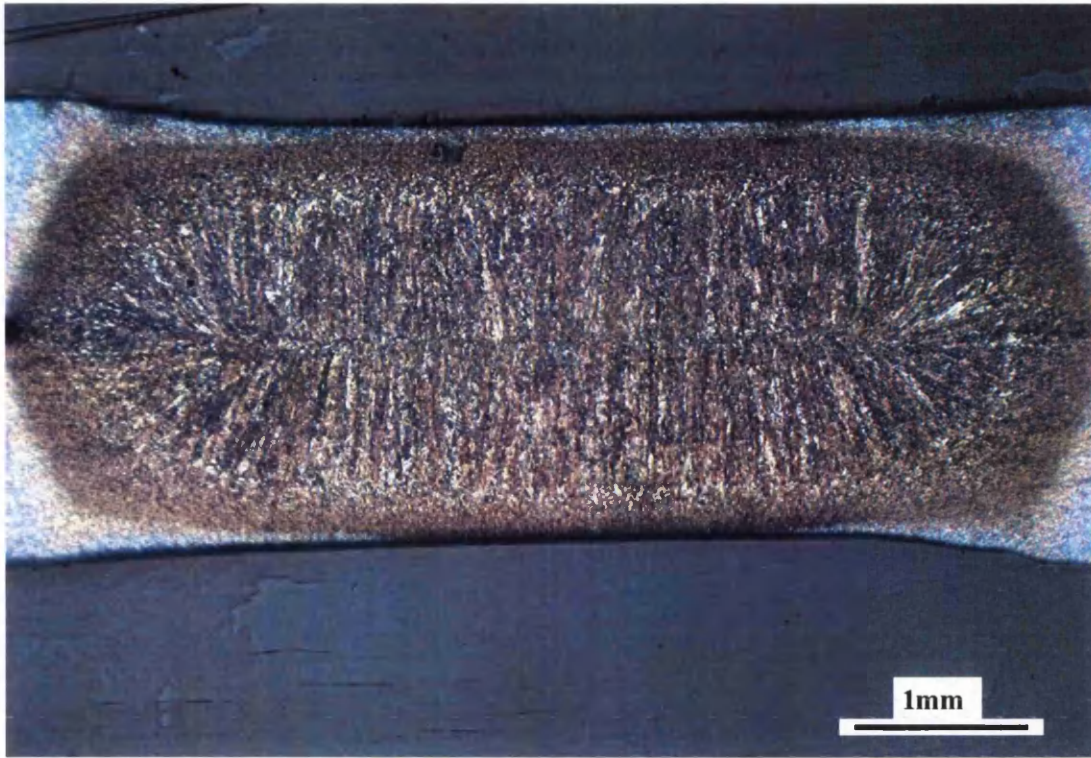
Macro of $5\sqrt{t}$ spot weld formed in 1.2mm TRIP800
